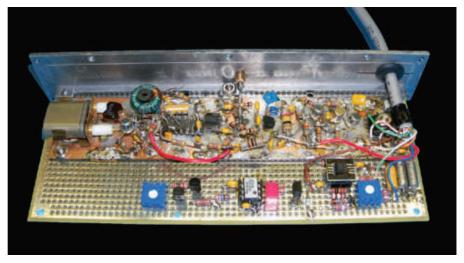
The sampling down converter is built dead bug style on a narrow strip of bare copperclad PC board and mounted on a piece of perf board for convenience. The sweep generator is built on the lower half of the perf board and the whole assembly mounted in a die cast aluminum box.
